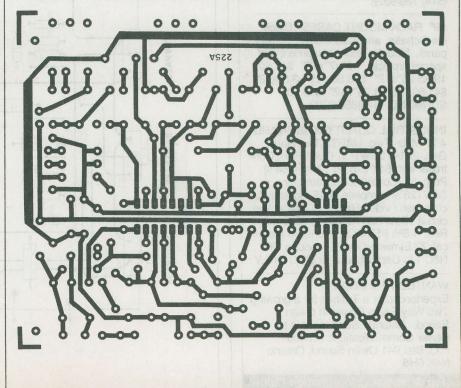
Printed circuit board component layout for the VCF and mixer.
